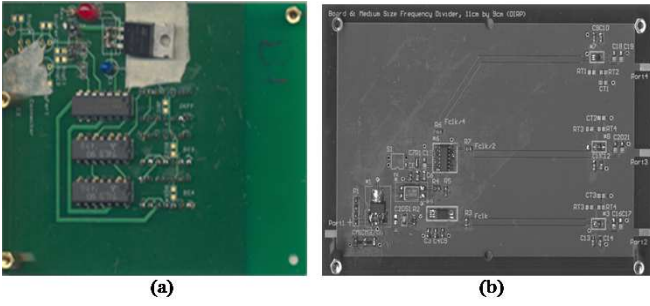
Two high-speed prototypes: (a) Board I. (b) Board II.
